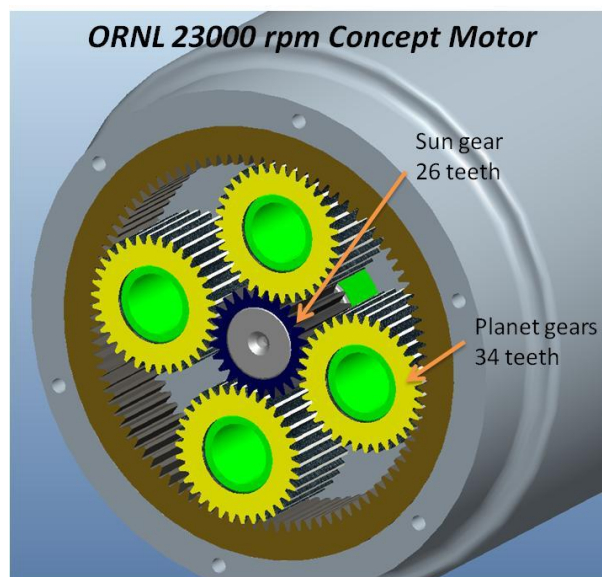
Close-up view of in-line planetary at motor shaft.
